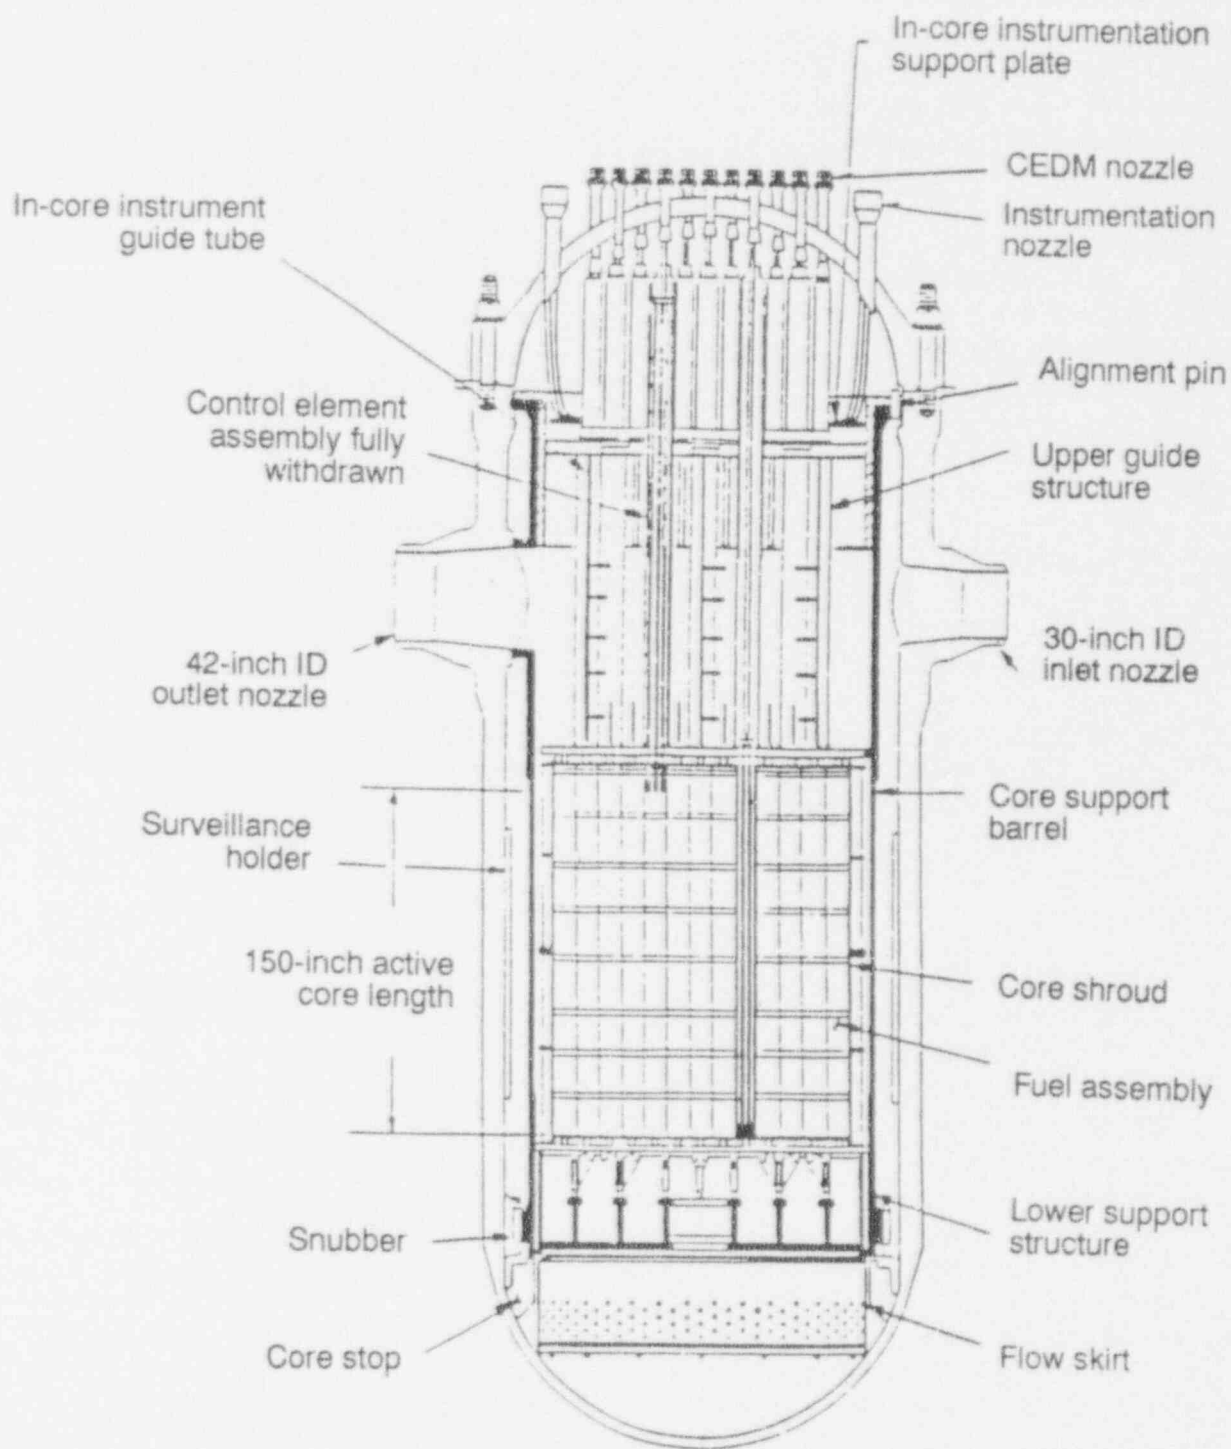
Arrangement of reactor vessel components in a typical CE PWR.
